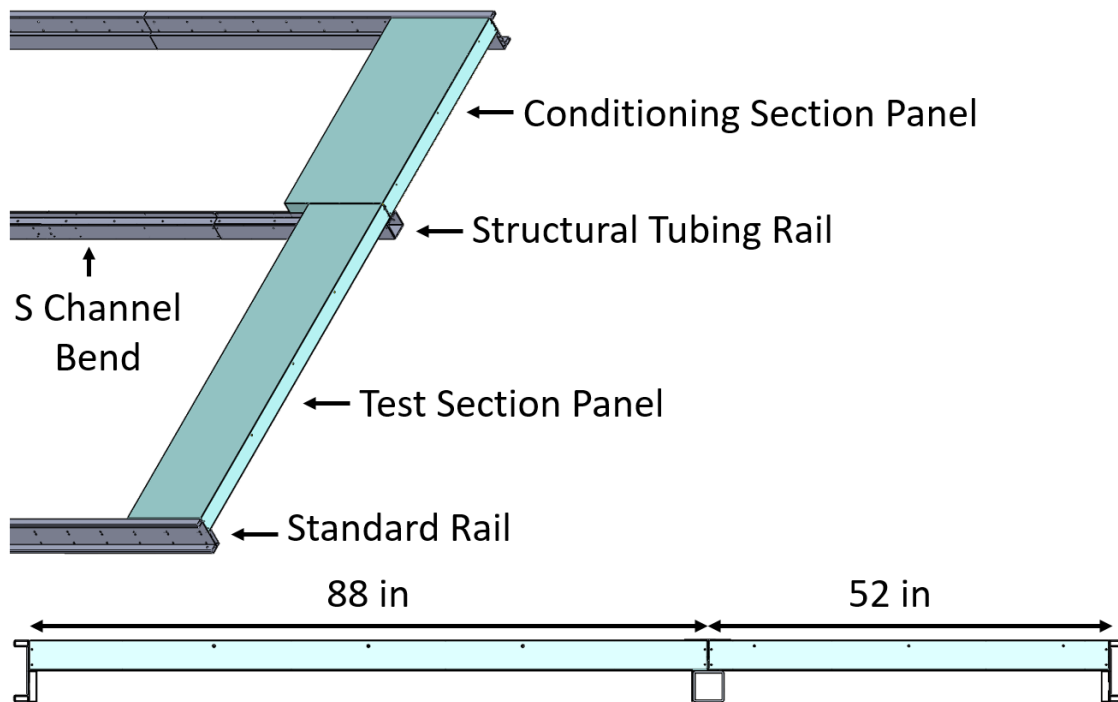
Top: View of parallel rails with both types of base panels. Bottom: Cross sectional view of rails with base panels.
